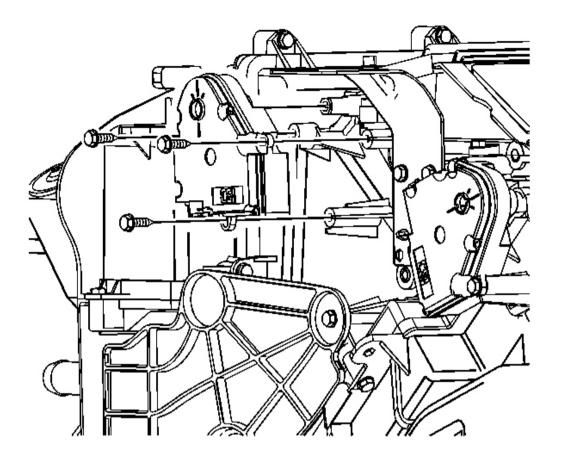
Panel Actuator, Screws & Evaporator Case Assembly Courtesy of GENERAL MOTORS CORP.
